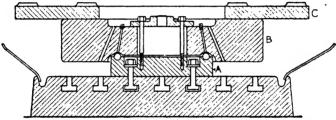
Details of the turntable made from an old diesel flywheel.
